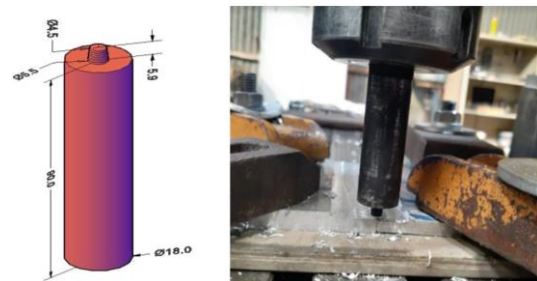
shows the shape and dimensions of the welding tool, which are a cylindrical tool with a conical serrated protrusion
